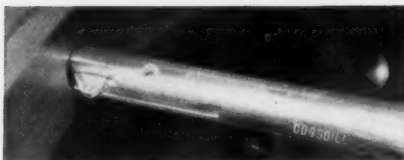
One pass now chamfers both faces of the hole. On the in-stroke the spring-loaded cutter on the Burraway catches the outer face; on the out-stroke it catches the back face. Spring pressure on cutter is quickly adjustable in order to change amount of chamfer.
